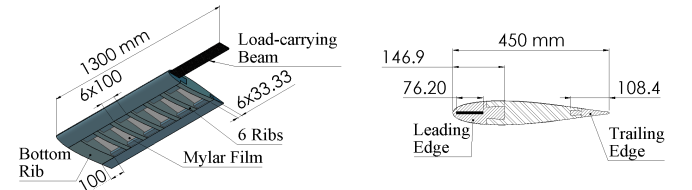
Tested specimen showing the load carrying carbon-aluminium beam, the foam-rib structure and the Mylar sheet as well as the principal dimensions.
